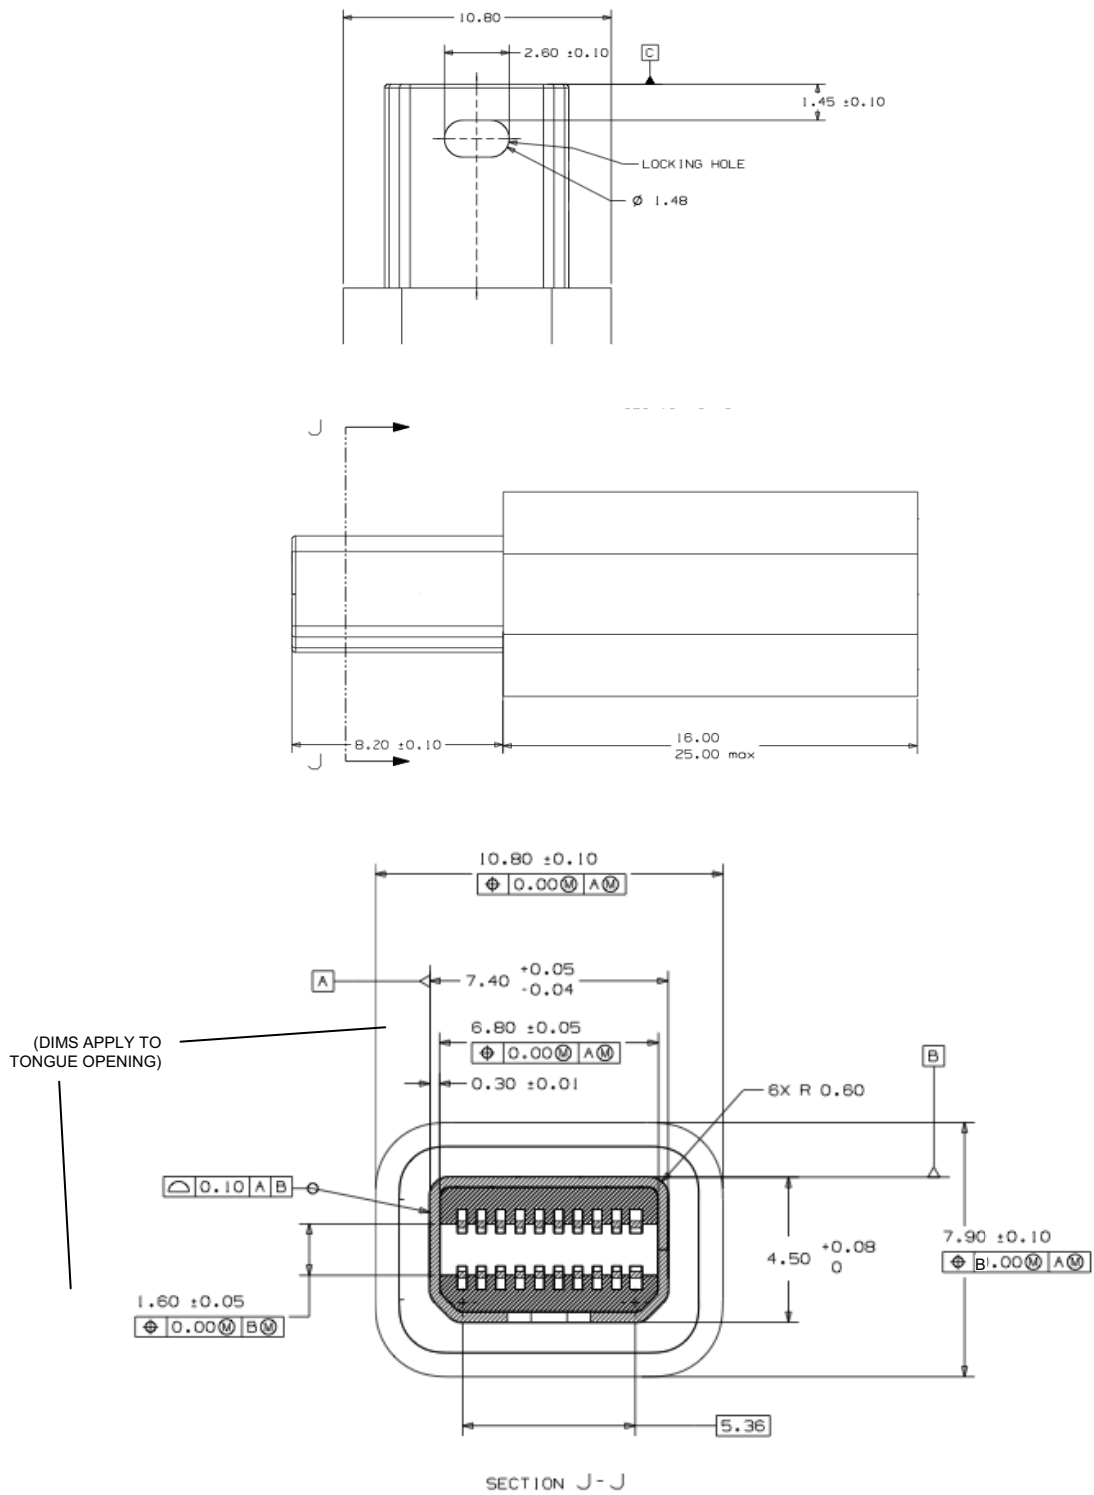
mDP Cable-Connector (Plug) Dimensions – 2
